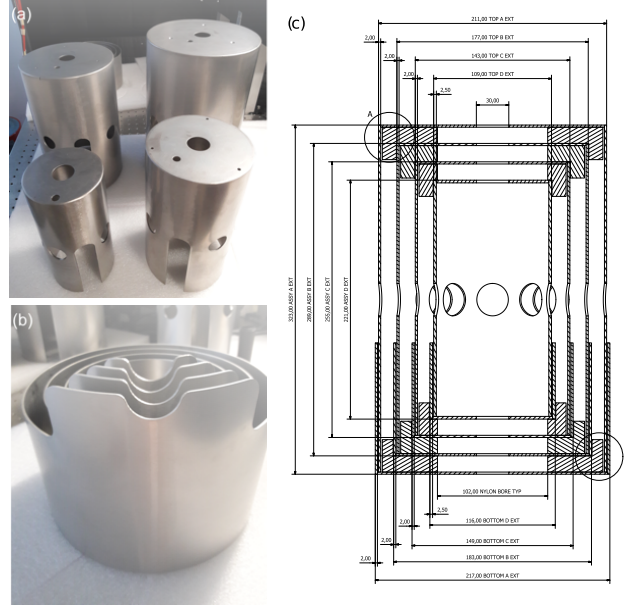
The finished four-layer magnetic shield. (a) The four upper pieces disassembled, (b) the four lower pieces assembled and (c) technical drawing of the shield with dimensions in mm.
